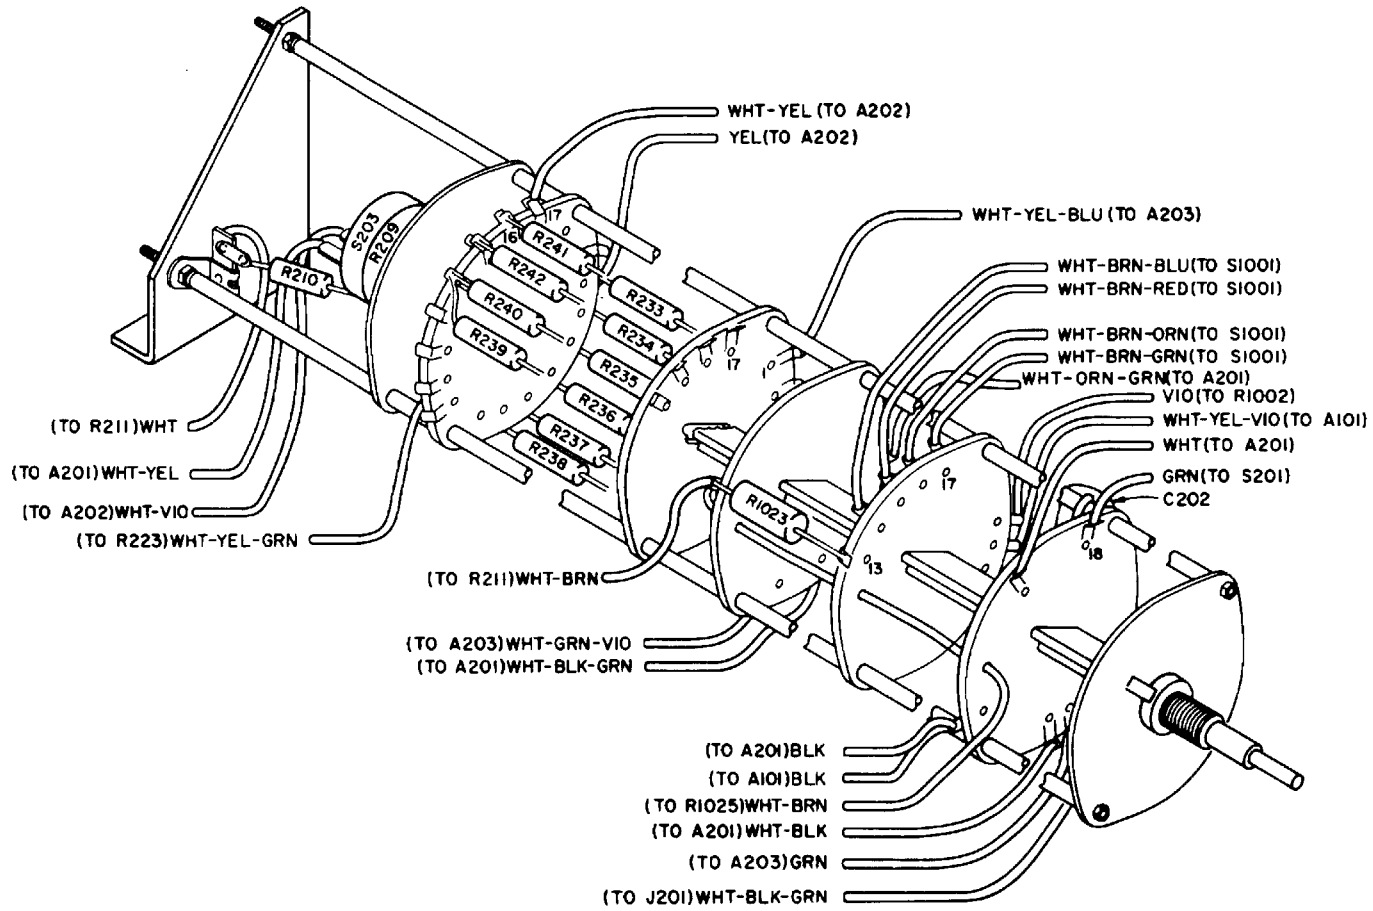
External Vernier/Horizontal Display Switch Assembly, Location of Parts
